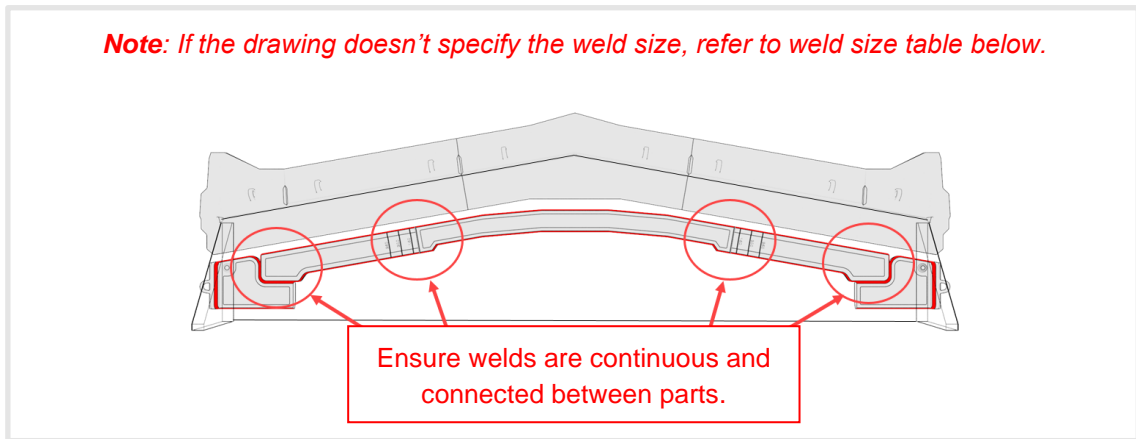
Continuous welds between parts (image for reference purposes only).
